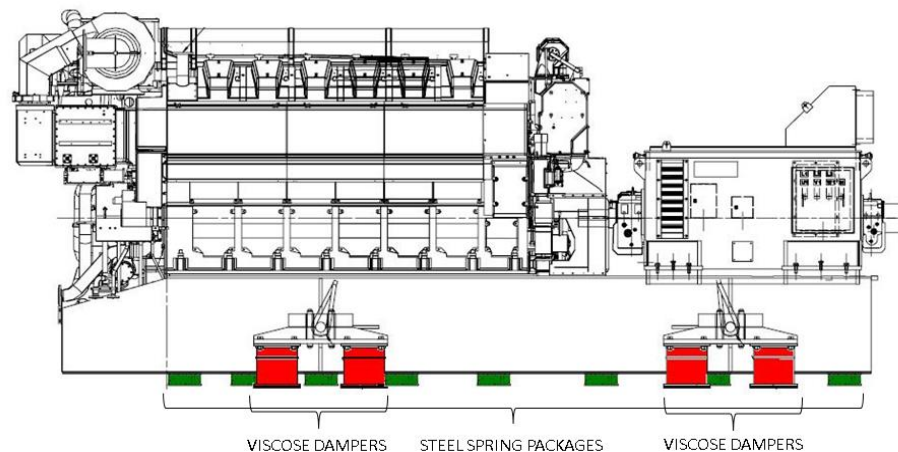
Flexible mounting and damping of EDG set. Steel spring packages (green) and viscose dampers (red) are mounted next to common base frame. [43]
